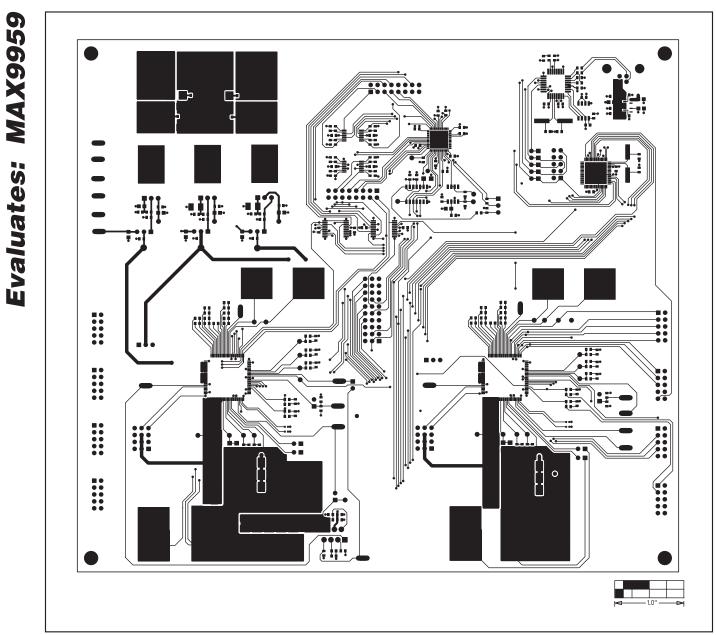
MAX9959 EV Kit PCB Layout—Component Side
